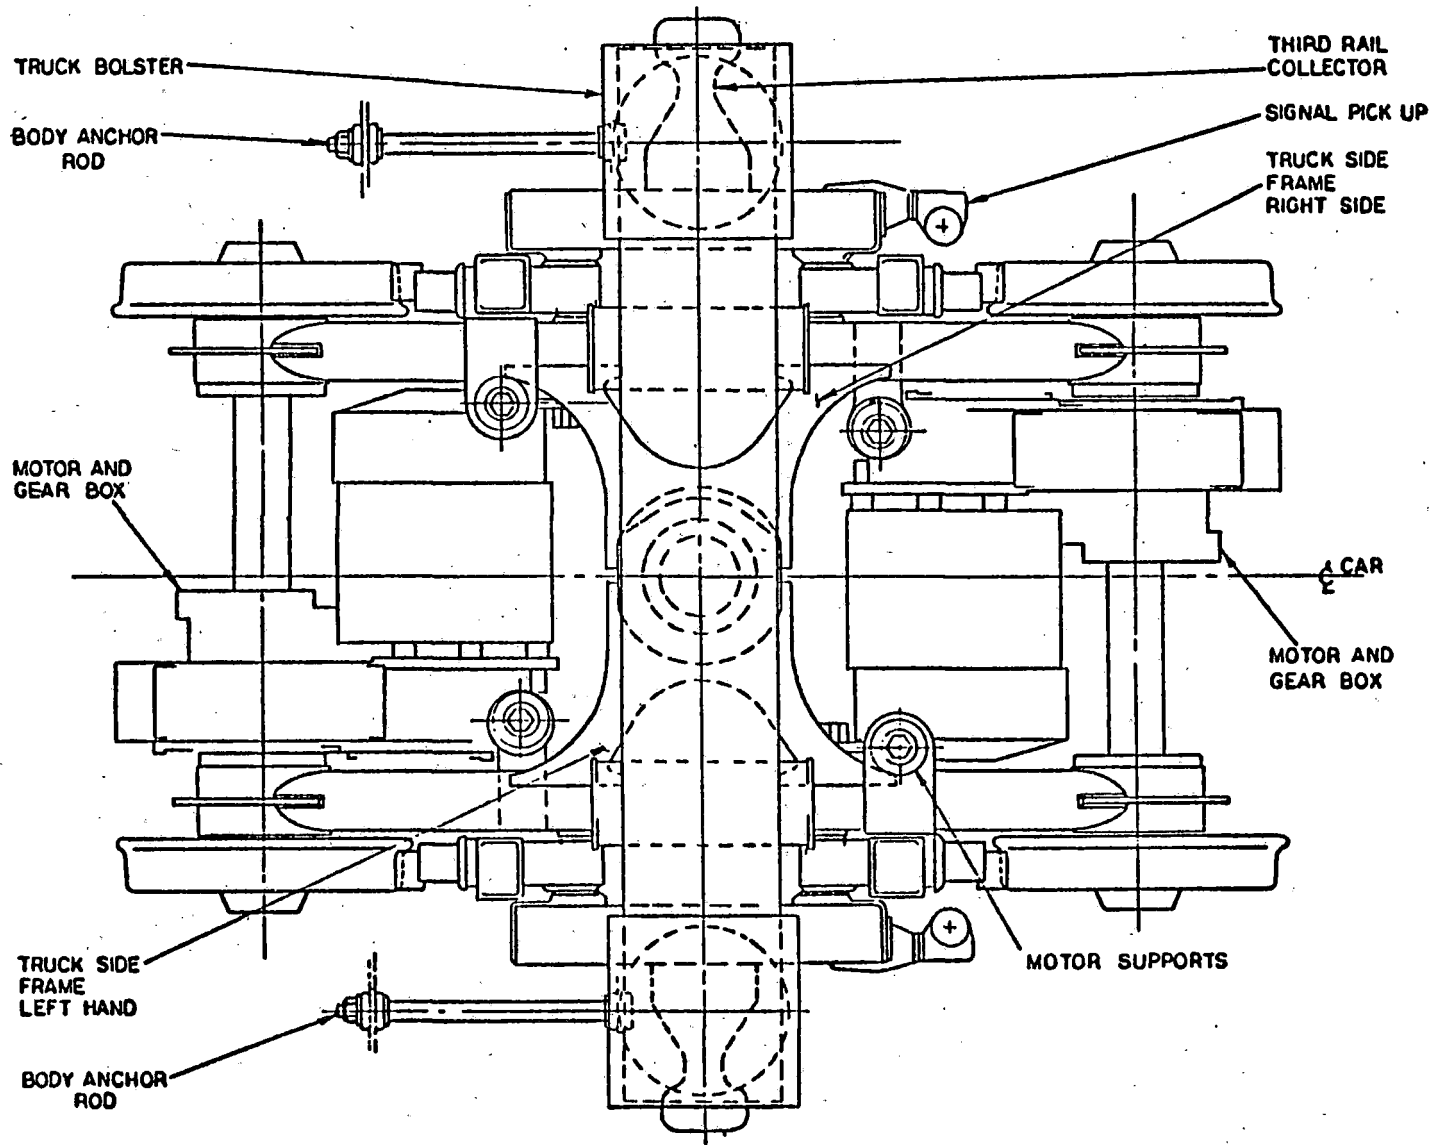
EXISTING PATCO P-III TRUCK, PLAN VIEW
